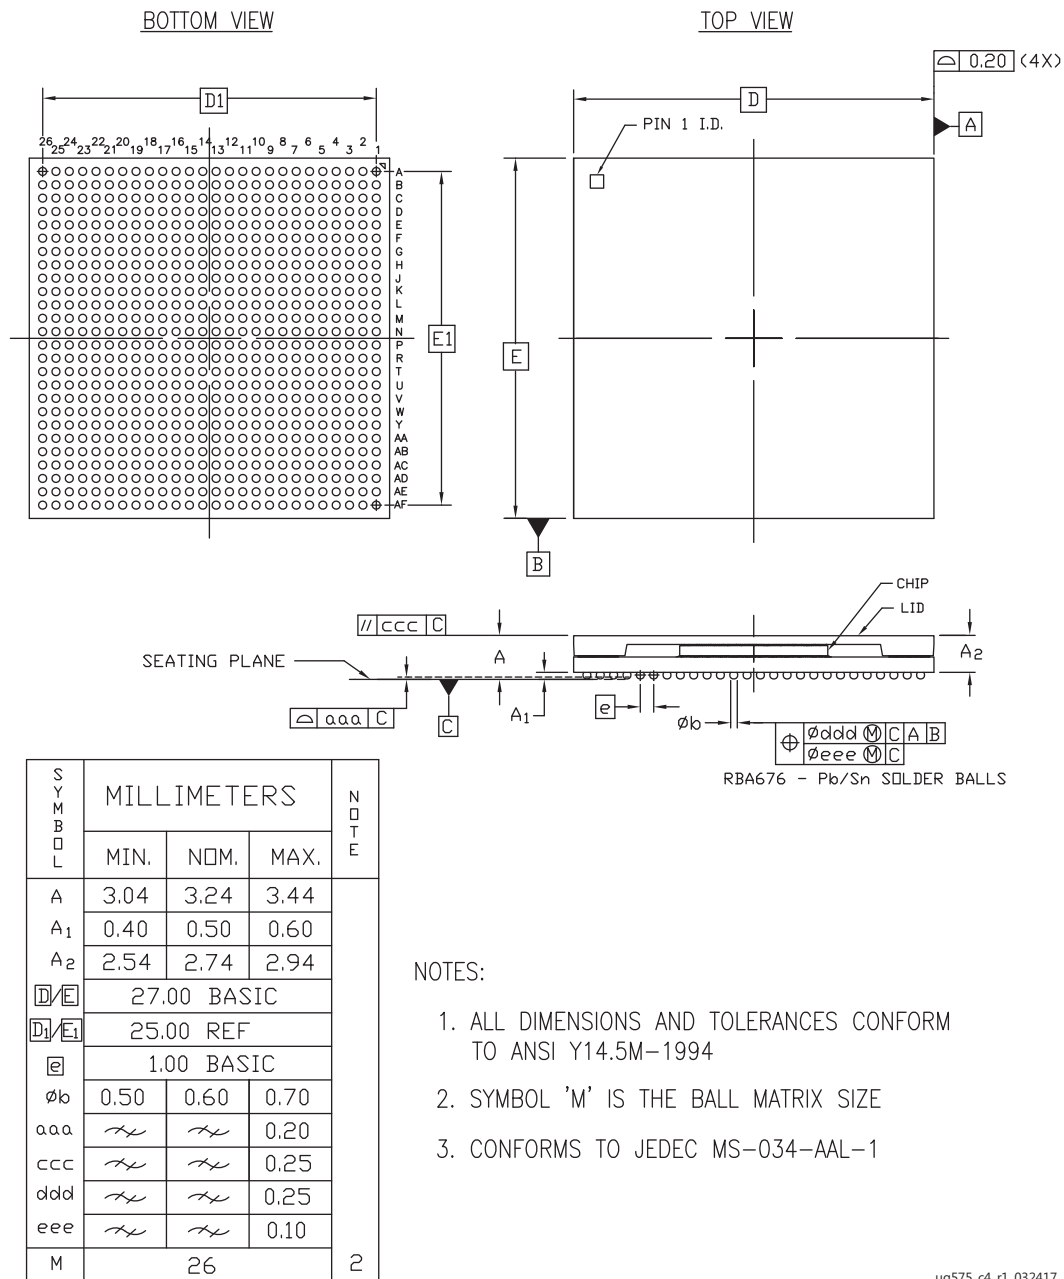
Package Dimensions for RBA676 (XQKU040)
